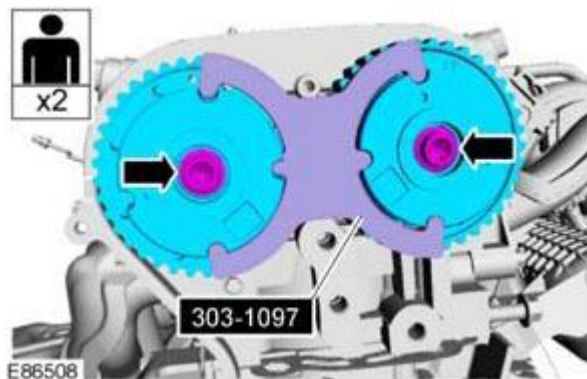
Locating Camshaft Phaser And Sprockets Bolts
